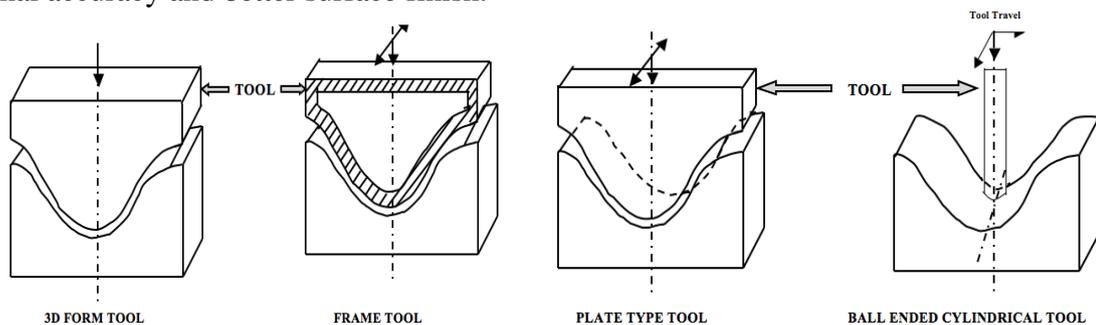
Design difference between 3D form tool, frame tool, plate type tool and ball ended cylindrical type tool.
